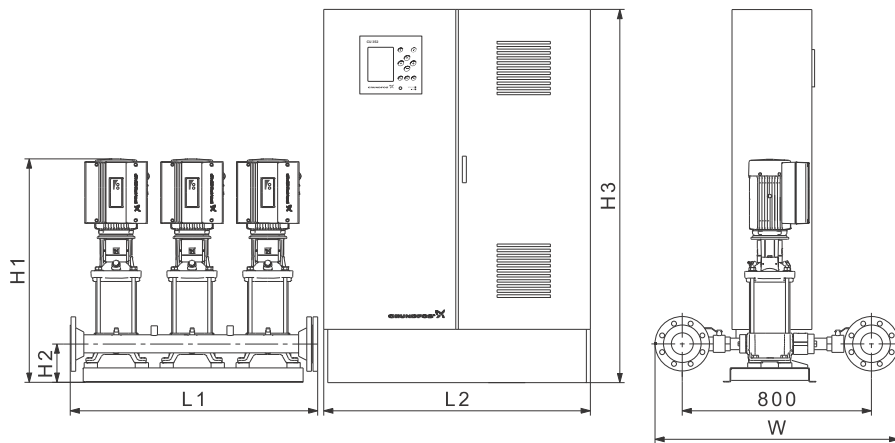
Dimensional sketch of a booster system with a control cabinet mounted on the same base frame as the pumps (design E). The booster system is shown as an example. The pumps supplied may differ from the sketch.
